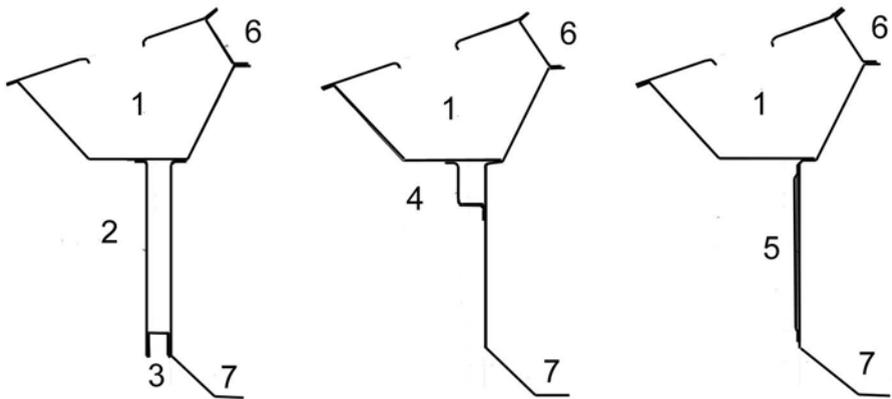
Vertical simplified sections of different dash panel. 1) dash upper; 2) twin fire wall; 3) rear fitting of front suspension arm; 4) reinforce cross member, sometimes used to fit steering housing; 5) sandwich assembly with plastic sheet in between; 6) cowl top; 7) front floor connection to dash lower panel.
